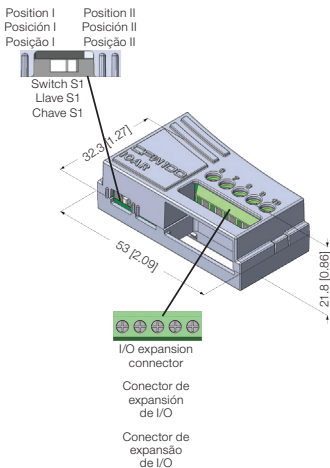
CFW100-IOAR dimensions in mm [in] and connectors location
